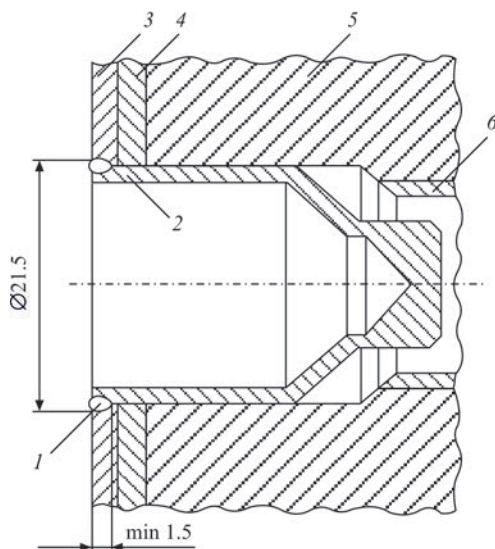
Scheme of plug welding in: 1 — weld; 2 — plug; 3 — first deposited layer; 4 — second deposited layer; 5 — SG wall; 6 — HET
